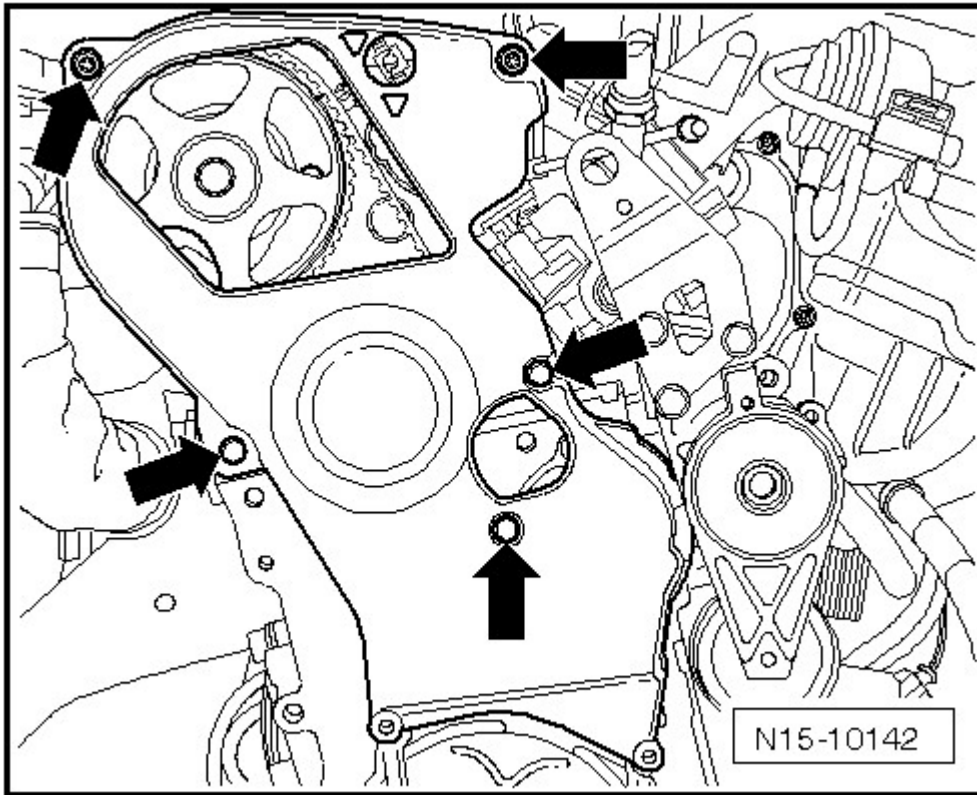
Identifying Remaining Bolts From Toothed Belt Guard
